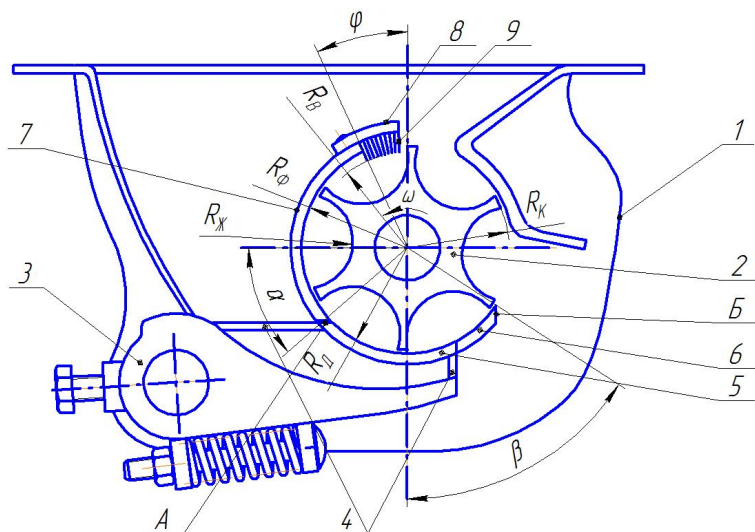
Scheme of the coil apparatus: 1 - housing; 2 - coil; 3 - valve; 4 - support; 5 - bottom; 6 - bevel; 7 - shaper-director; 8 - brush; 9 - pile; A - the front edge of the bottom; B - rear edge of the bottom
